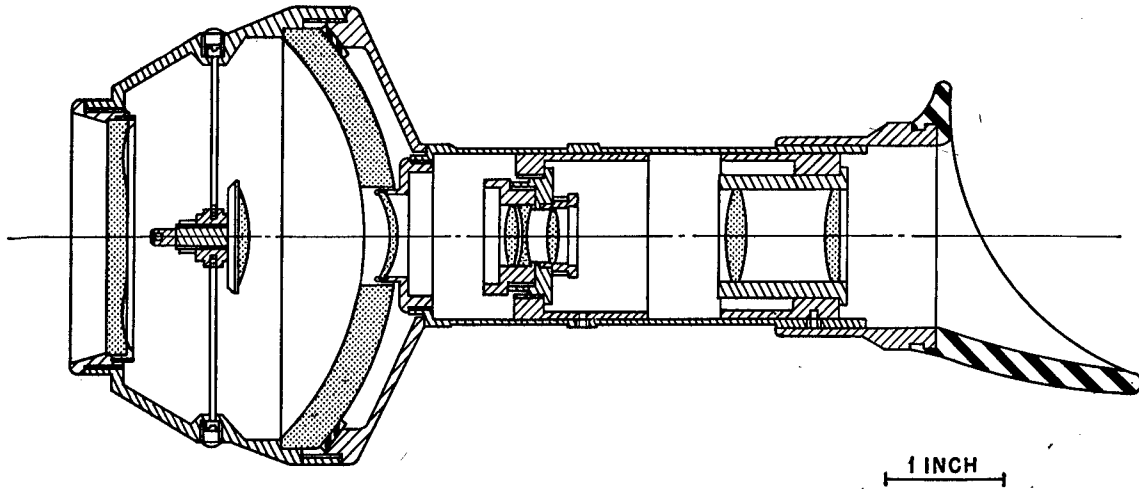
Two-inch ultraviolet telescope, assembly drawing.
